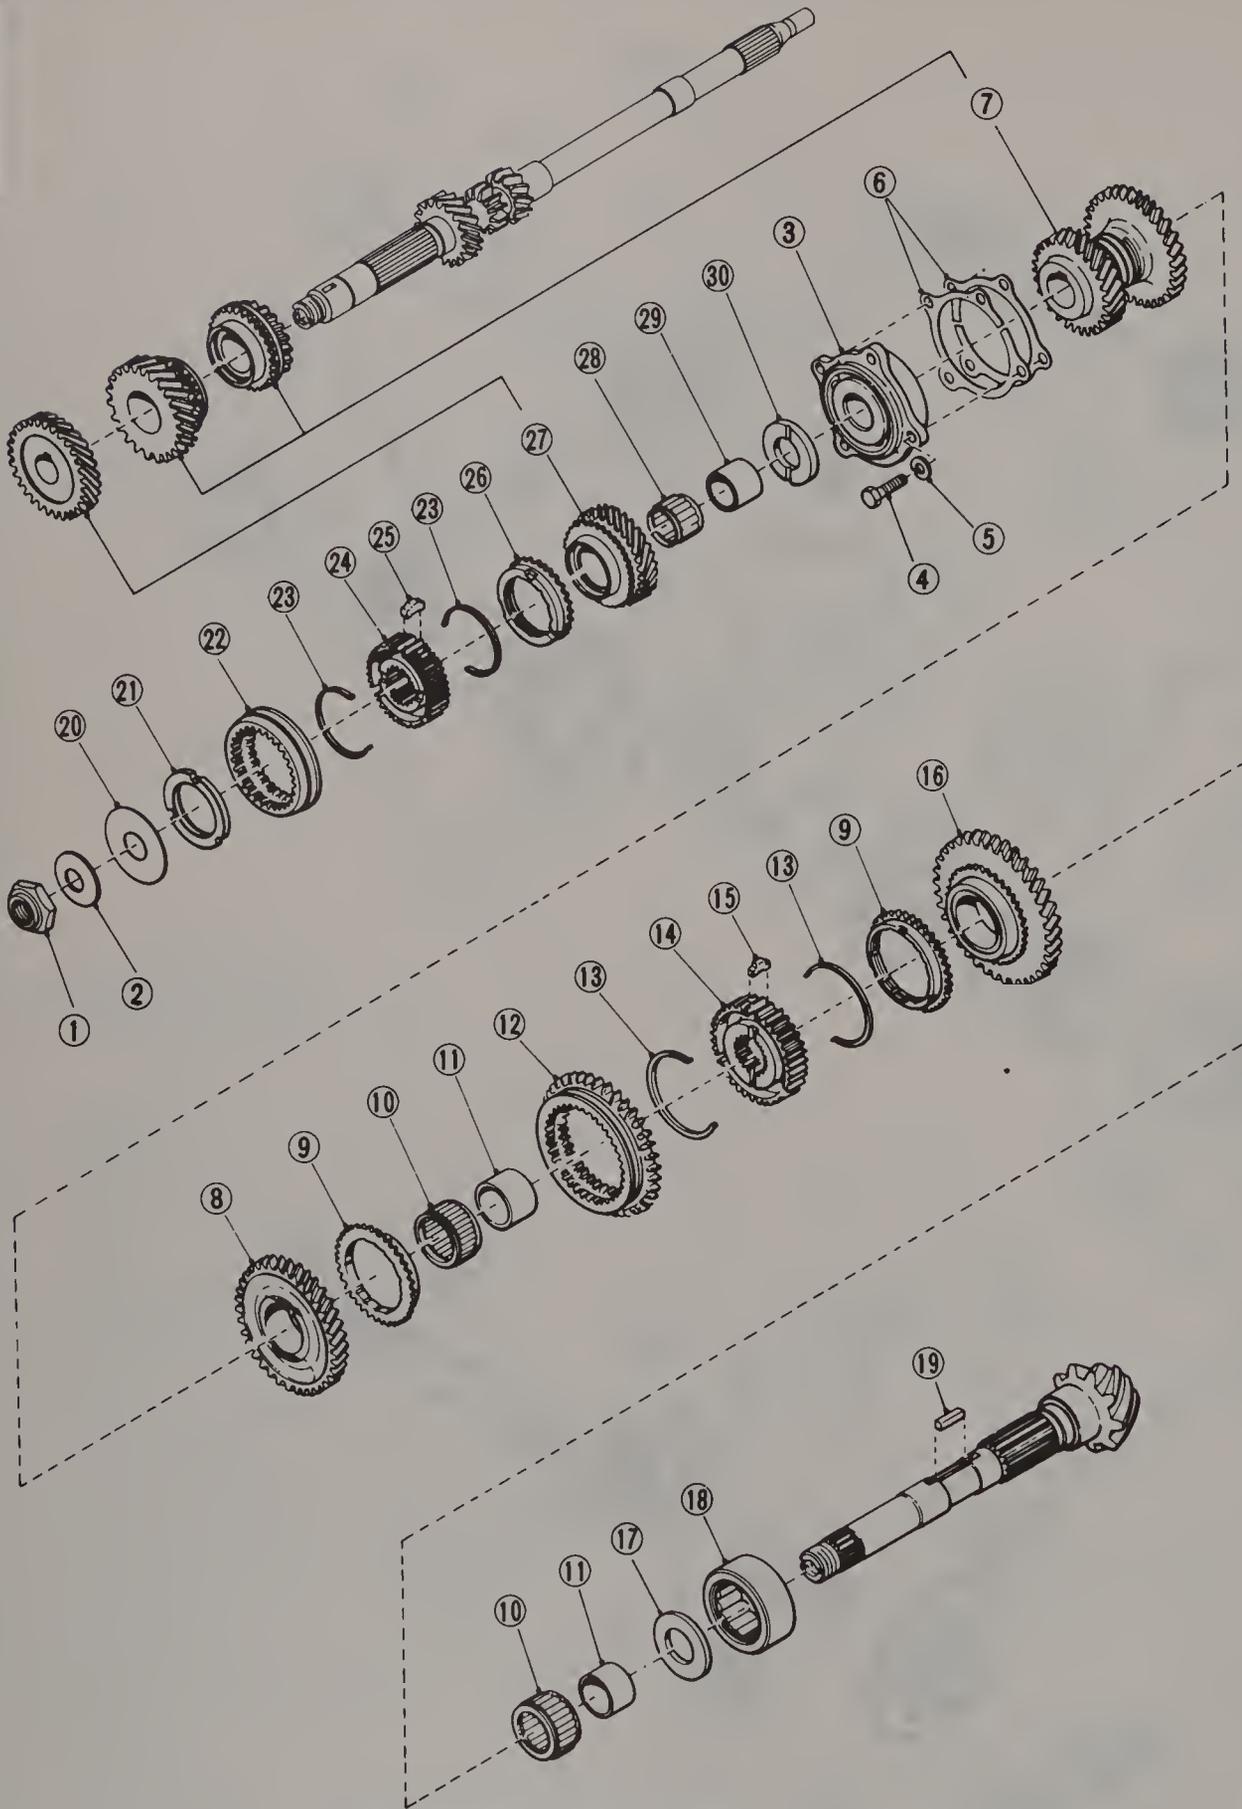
Drive pinion components (5-speed) – exploded view
